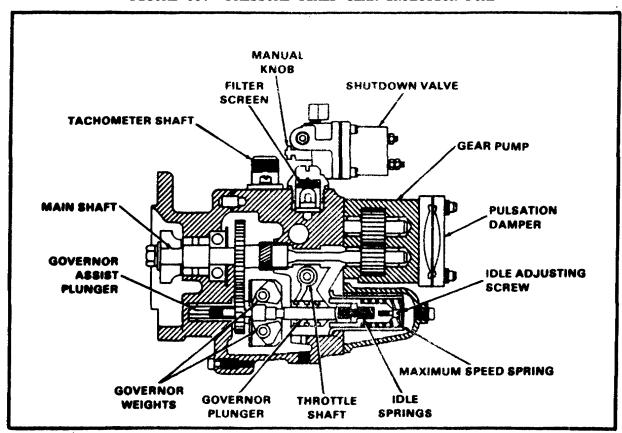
PRESSURE-TIMED GEAR INJECTION PUMP
